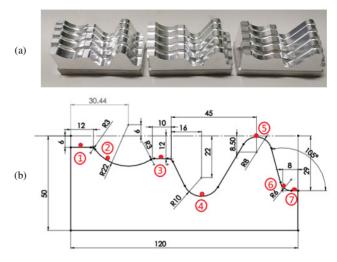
(a) Machined workpieces and (b) Geometry dimension of the surface profile of the worjpiece.
